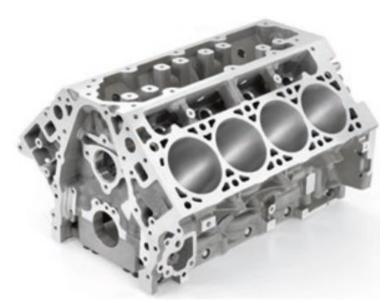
Engine Block of Corvette that is made by Sand Casting Process [5]
